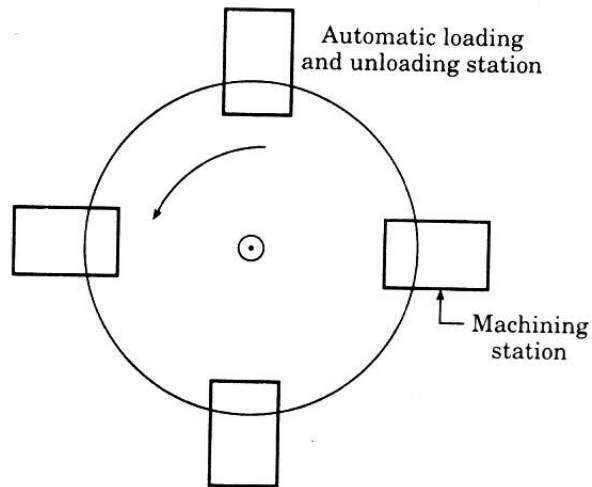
(b) Rotary indexing table transfer machine arrangement.
